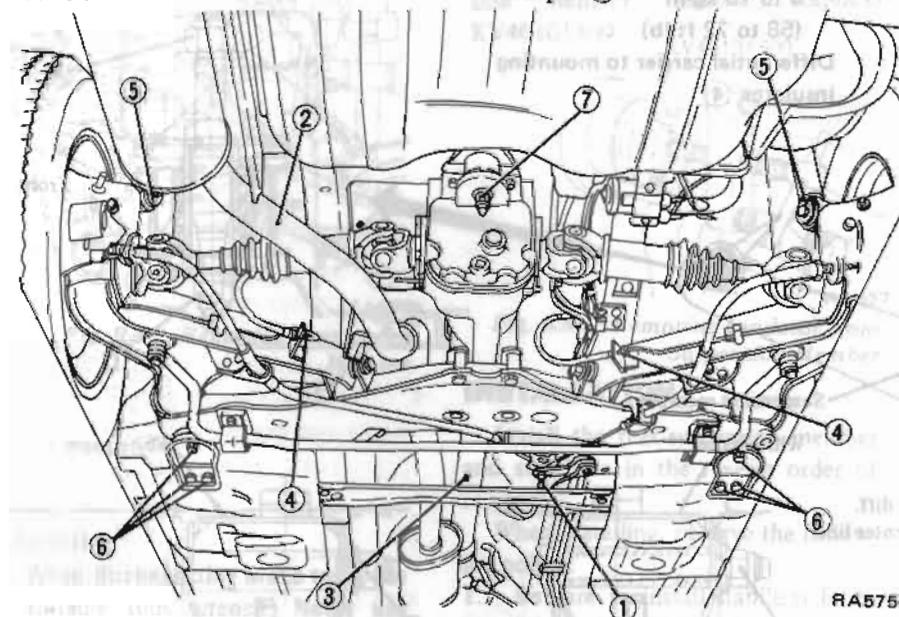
Suspension and Rear Axle Assembly Removal Points
